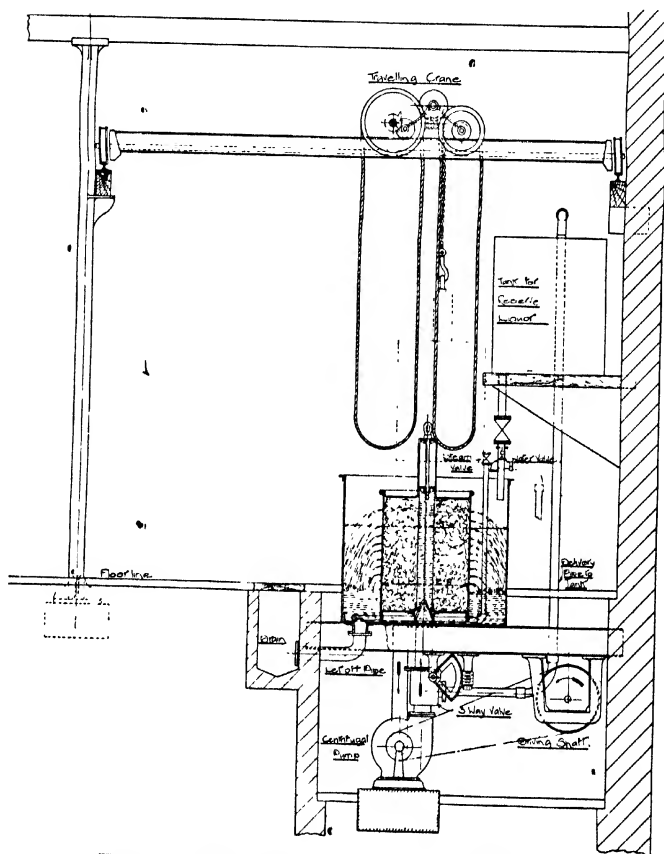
Obermaier's Loose Cotton Dyeing Machine.
